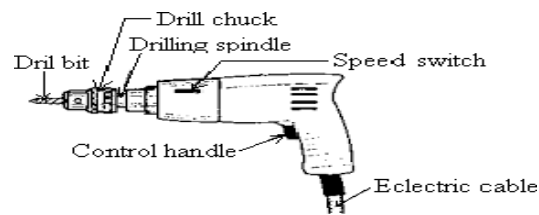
Portable drilling machine or Electrical hand drilling machine
